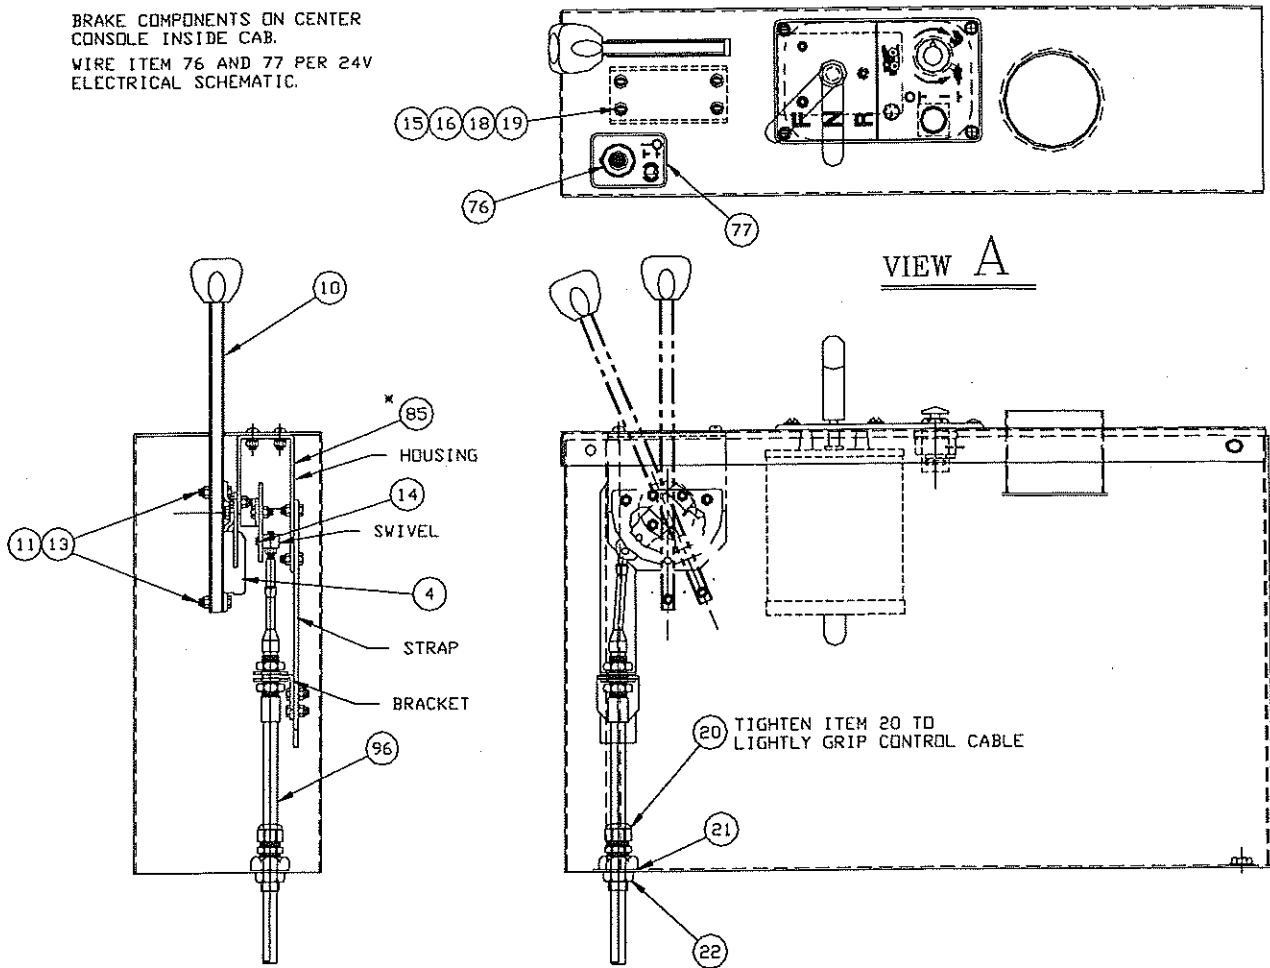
BRAKE SYSTEM ASSEMBLY (A85184, SHEET 1 OF 11)
